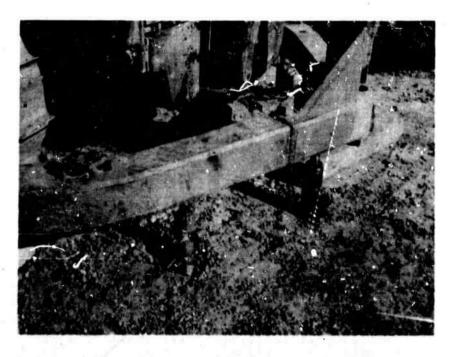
DOZER YOKE, WHICH HAS BEEN CUT, REMOUNTED ON TRACTOR AND JACKED INTO PLACE FOR REWELDING.
